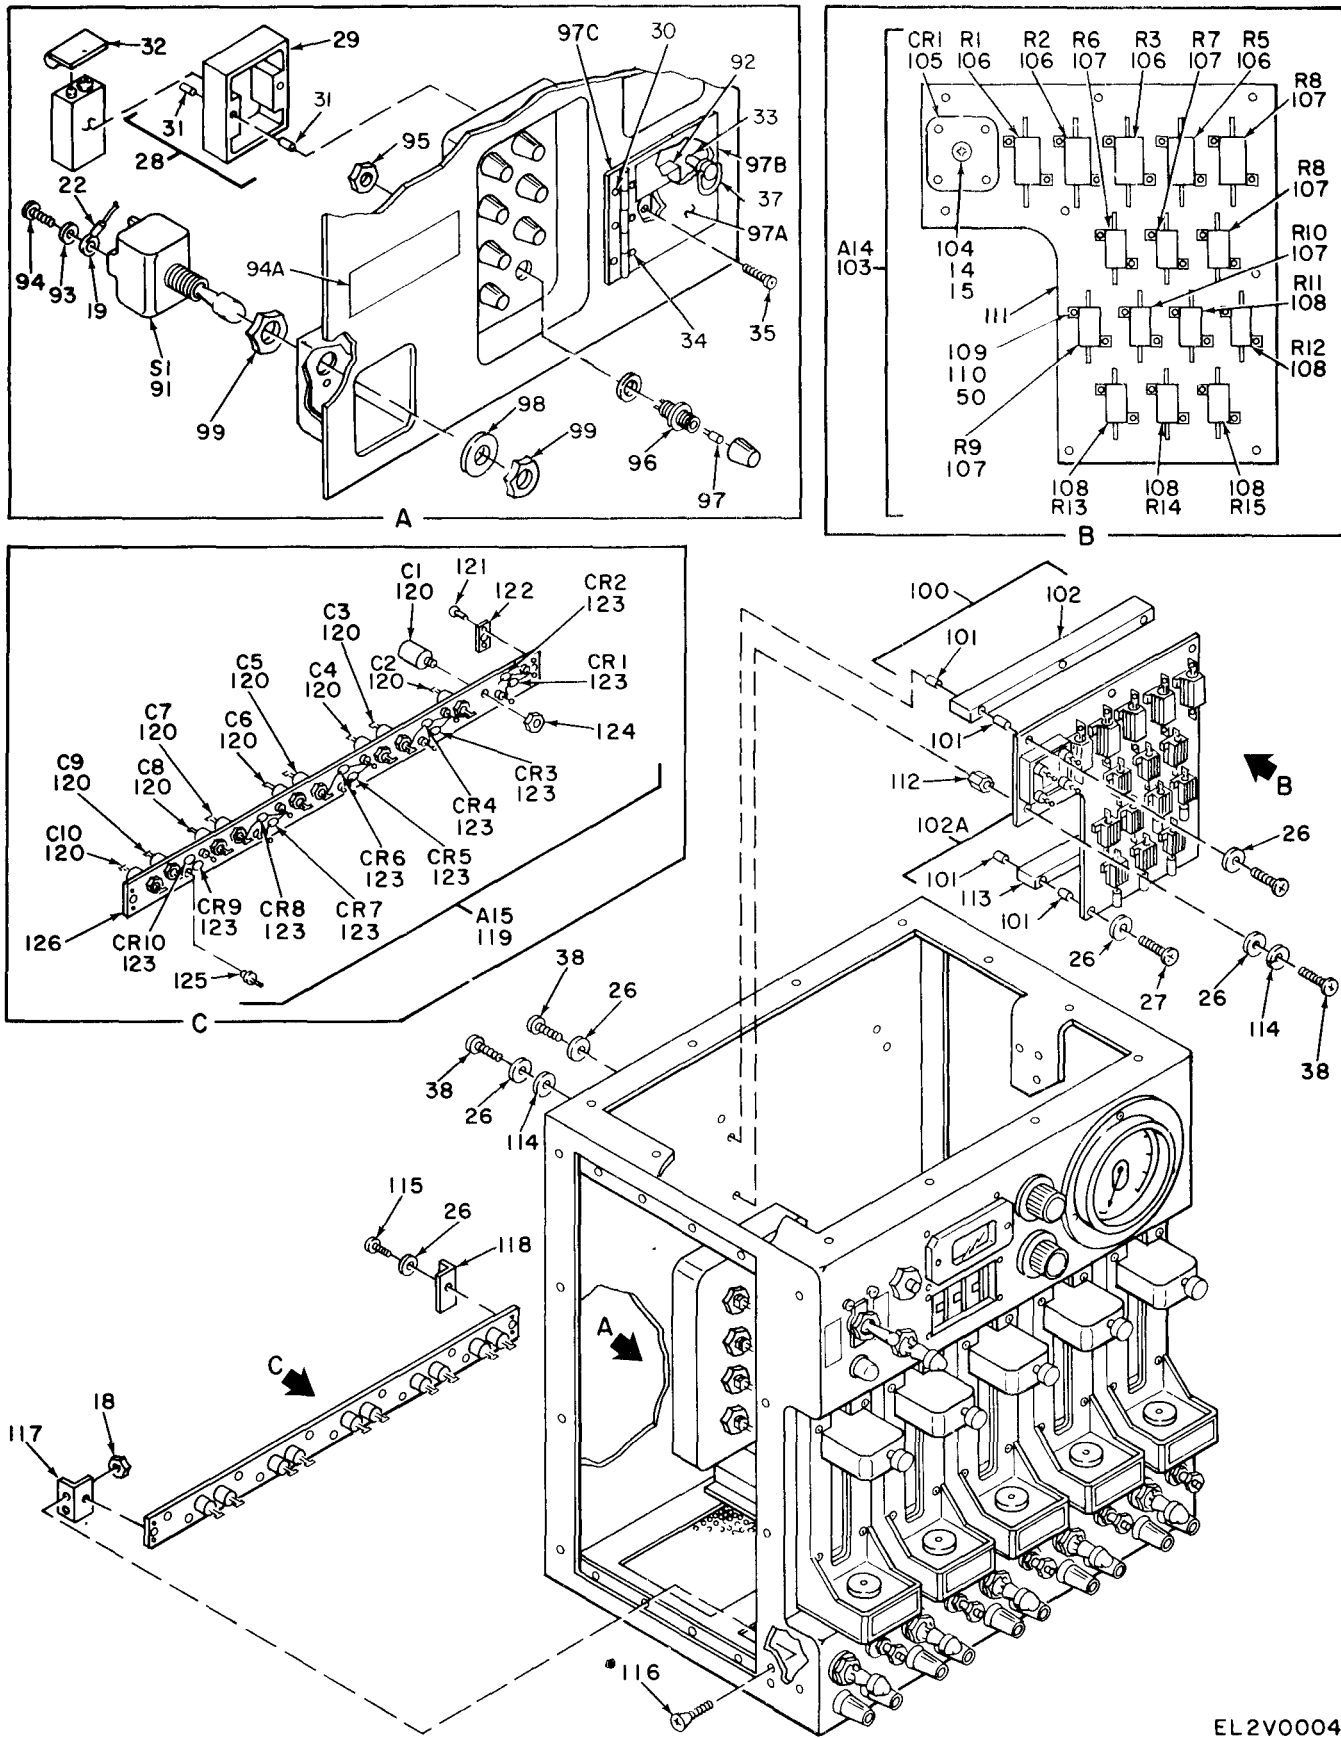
Battery Charger Assembly (Sheet 3 of 5).
